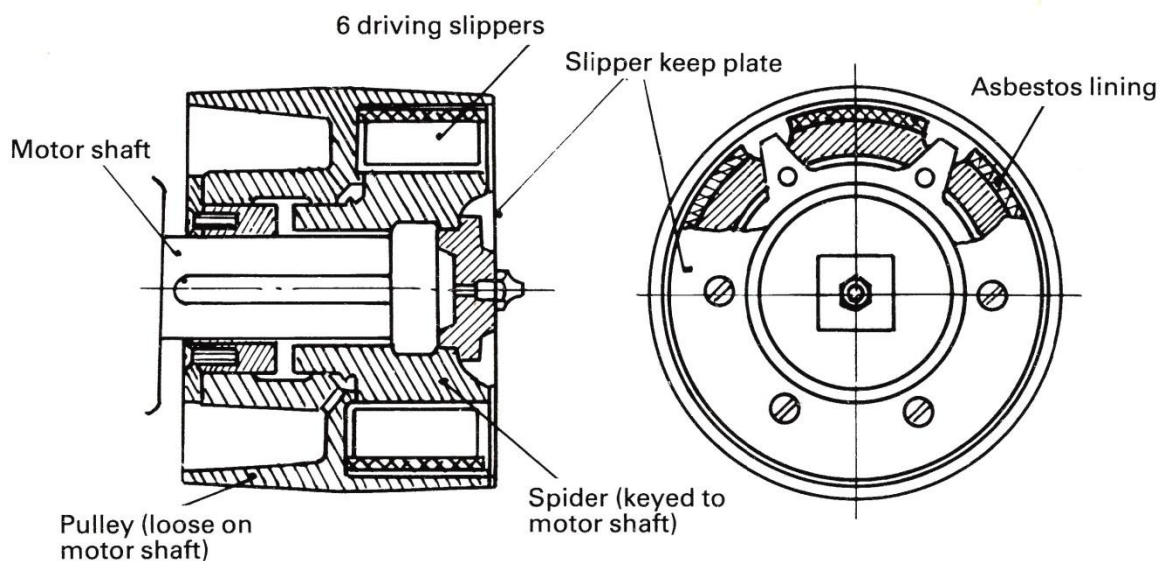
Loose-weight type of centrifugal clutch (assembled view)
